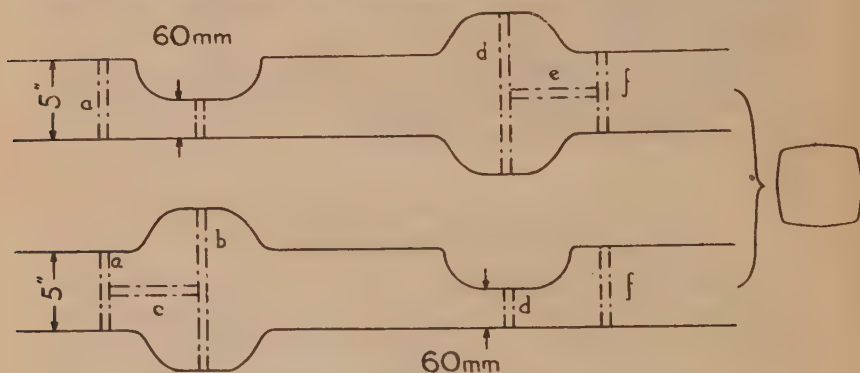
Sketch showing Manner of Local Forging of Billet.
